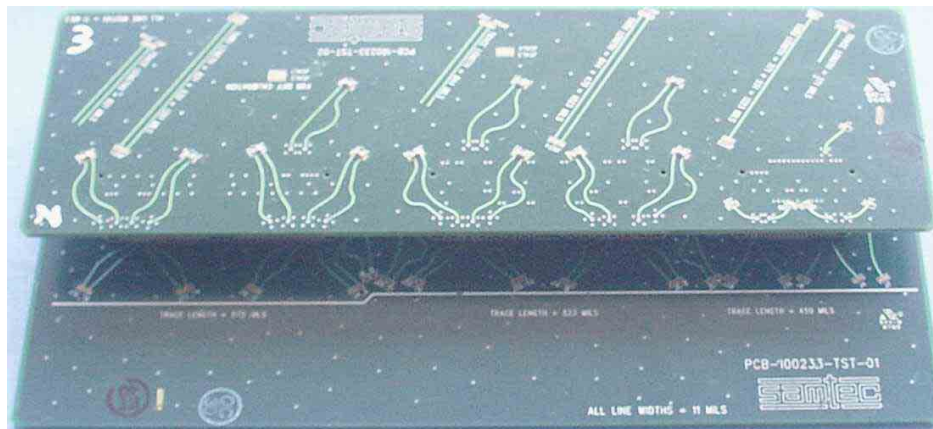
Mated PCB Test Fixture with Mounted Test Connectors
